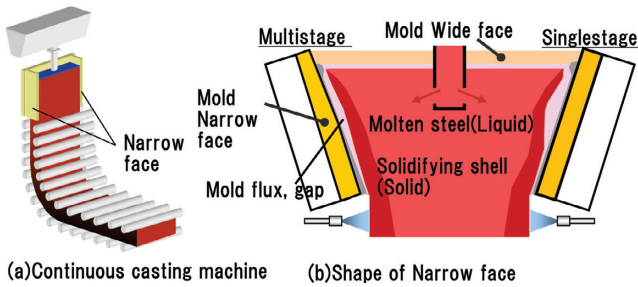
Shape of mold narrow face and distortion of solidifying shell
